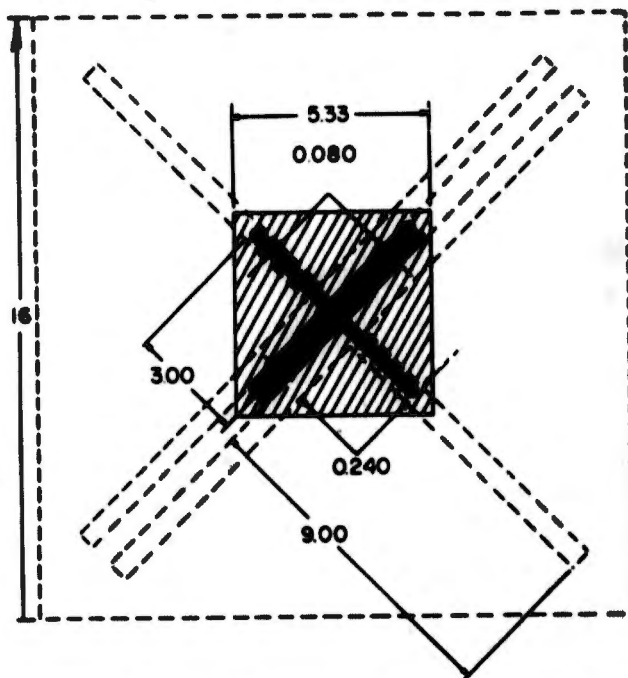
SIZE OF BAR PACKS REQUIRED TO PRODUCE 20-FOOT (AND 40-FOOT) STRUCTURAL SHAPES⁽¹⁶⁾
